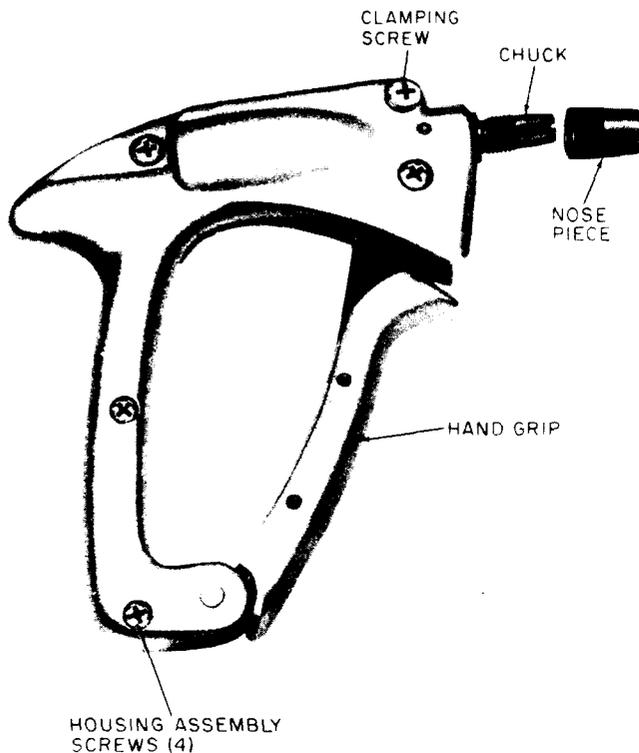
KS-16363, L2 and L3, Wire-Wrapping Tool
